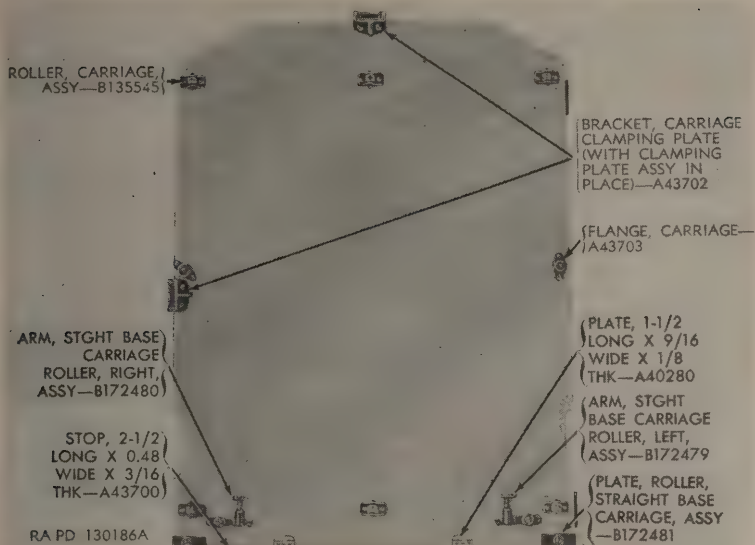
Straight-base carriage assembly—sound-ranging plotting board M1 or M1A1.
